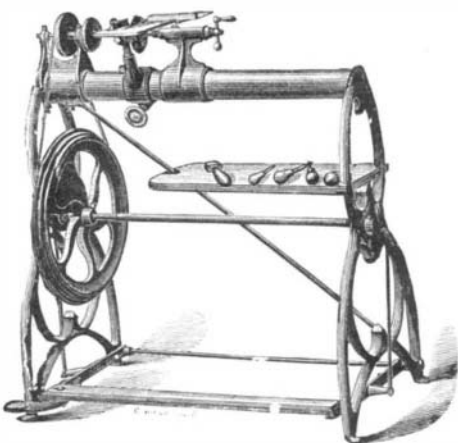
LATHE WITH CIRCULAR SAW ATTACHMENT.
